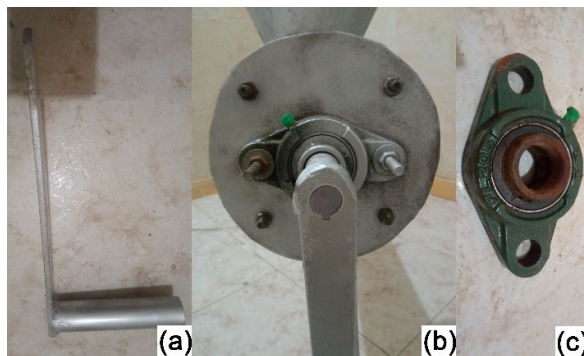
(a) Crank handle, (b) notch for the crank handle, (c) Self-aligning bearing housings
